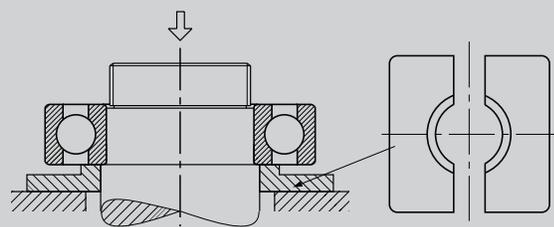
Dismounting of Inner Ring by using Hydraulic Press
